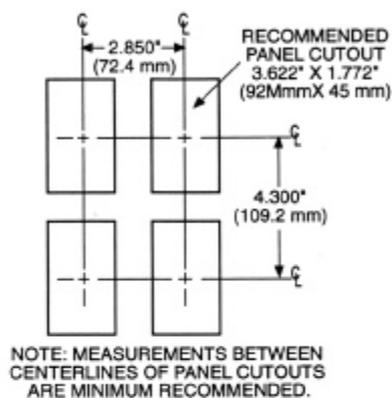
Panel Cutout Dimensions, 1/8 DIN
